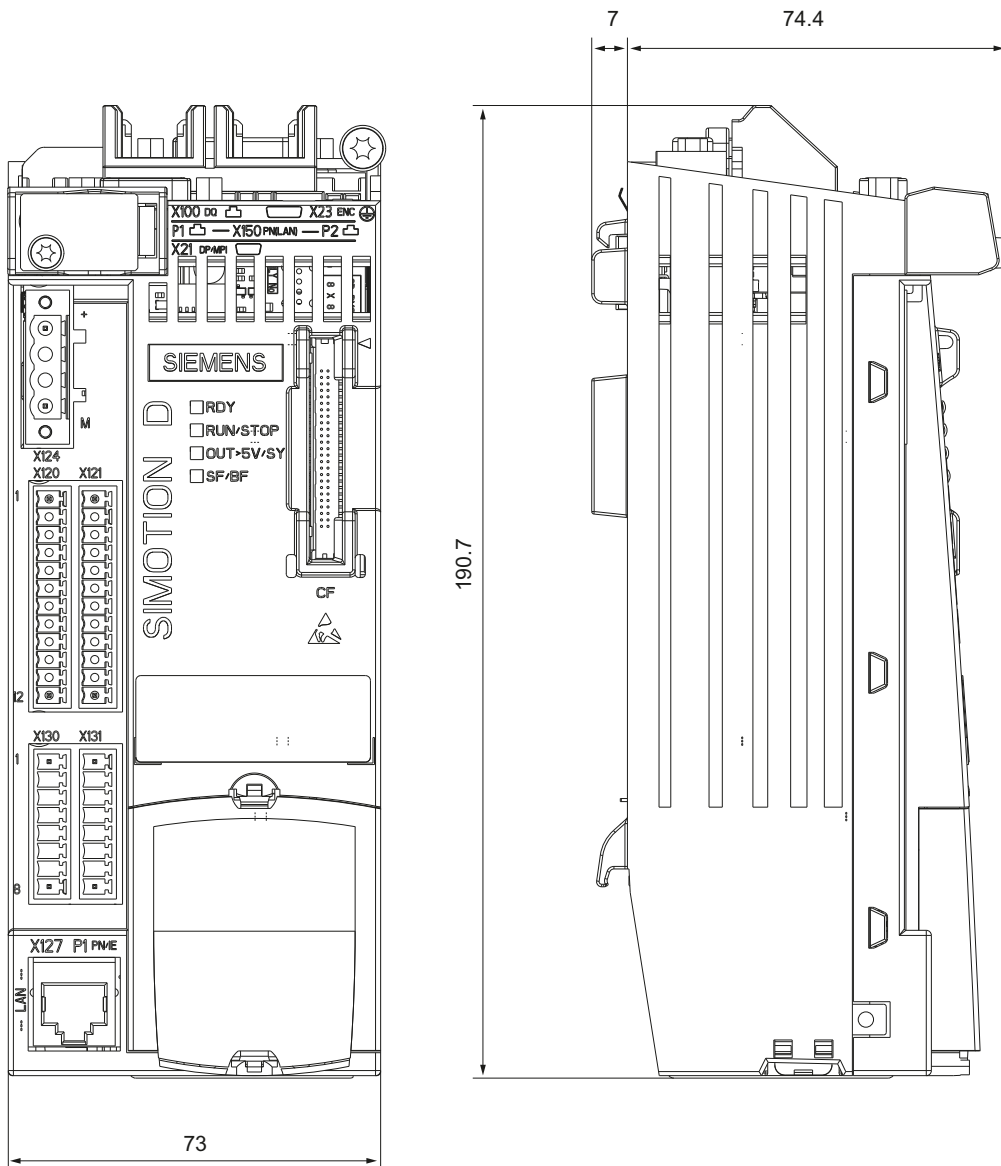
SIMOTION D410-2 DP/PN dimension drawing (dimensions in mm)
